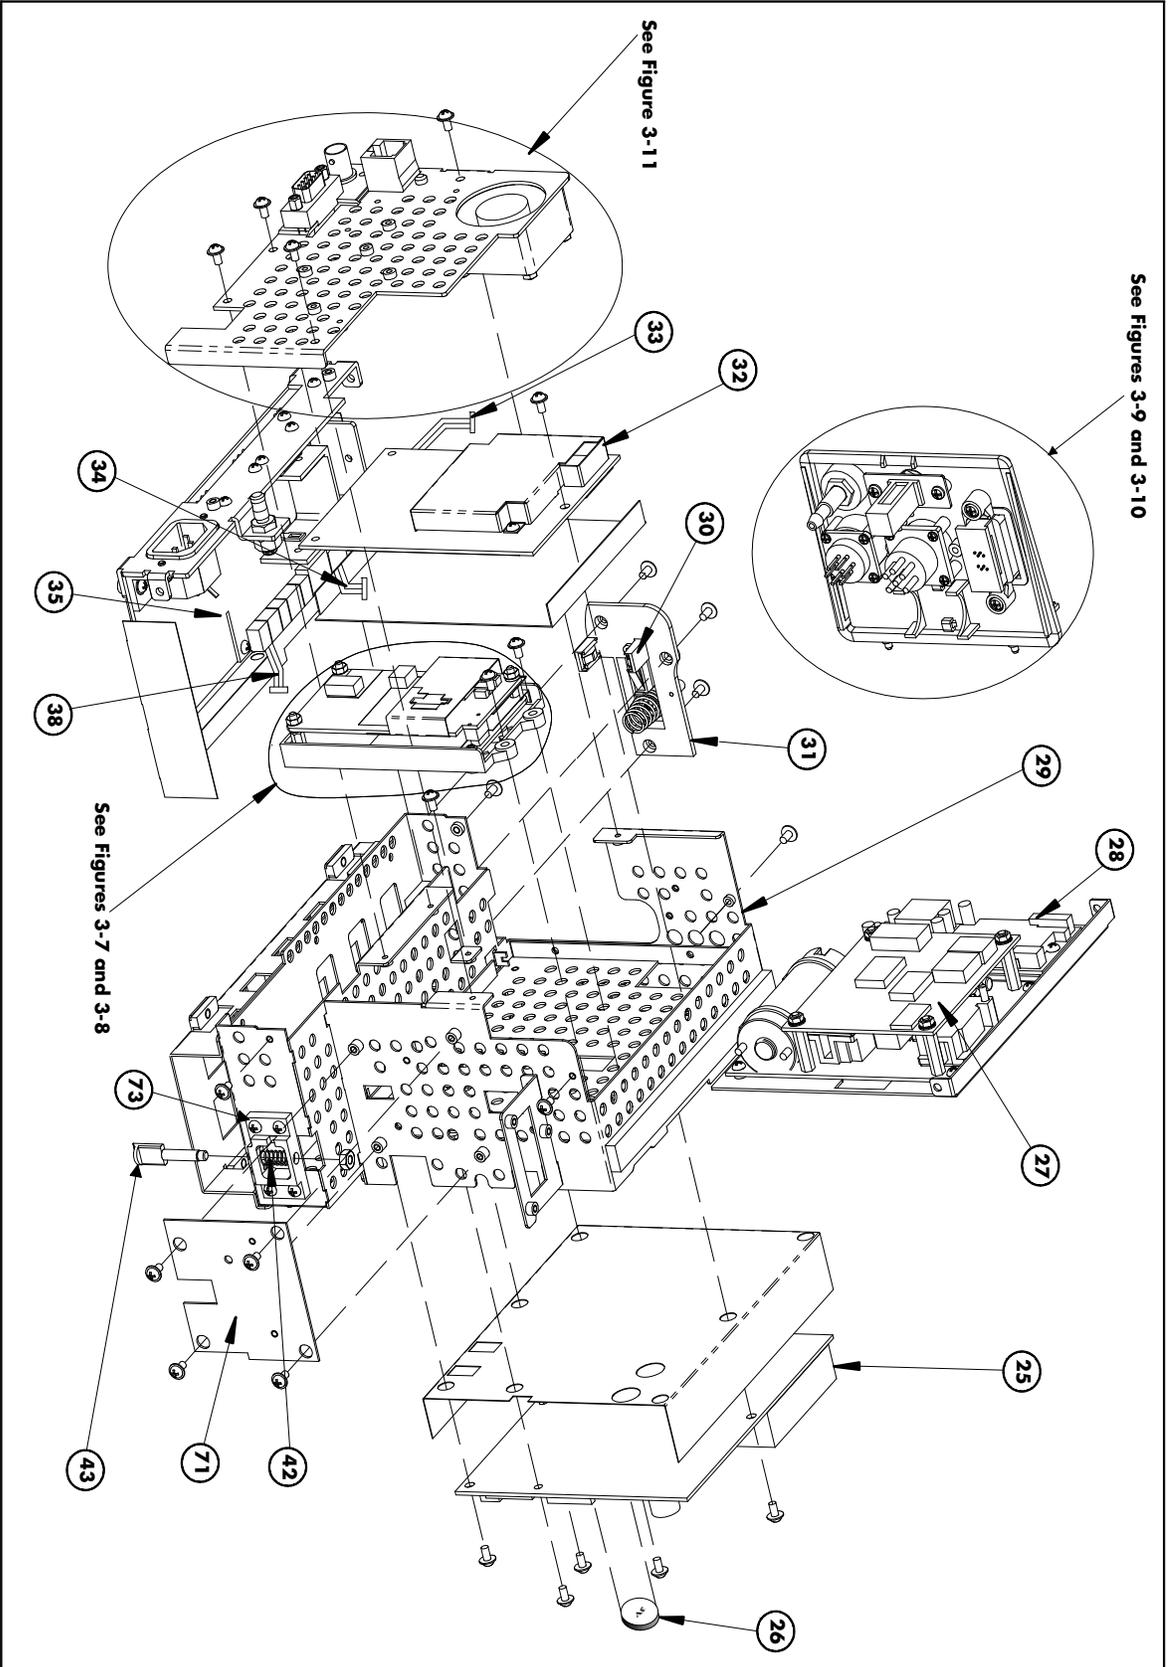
Main Chassis Sub-Assembly (SLA)
